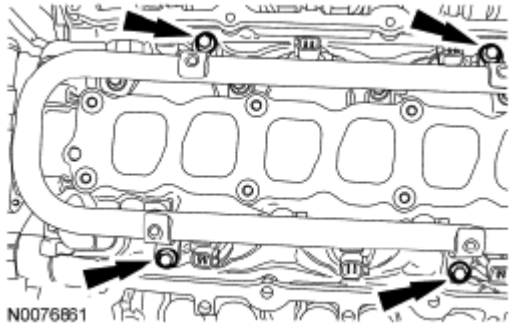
Locating Injectors Assembly Bolts & Fuel Rail
